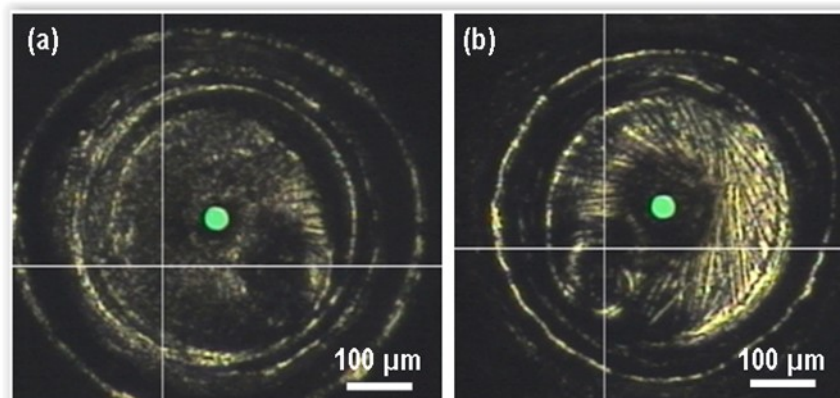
Drilled pre-indented gasket (10 mm thick), the hole diameter is 35 mm on the top side (a) and 34 mm on the underside (b).
